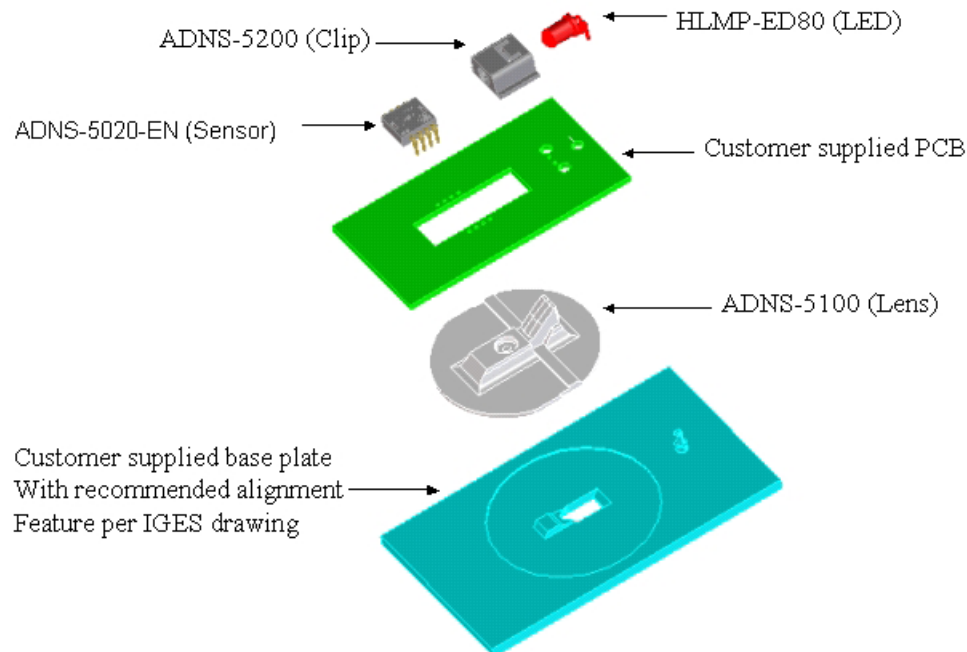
Exploded view drawing of optical tracking engine with ADNS-5020-EN optical mouse sensor.
